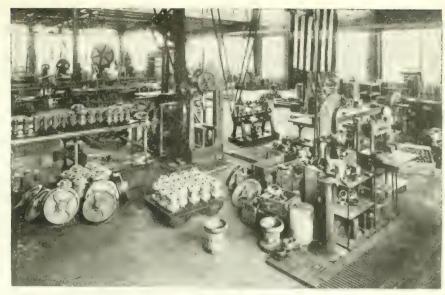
FINAL TEST DEPARTMENT WHERE BEARINGS ARE ADJUSTED AND RUN UNDER SPECIFIED LOADS, ETC.
